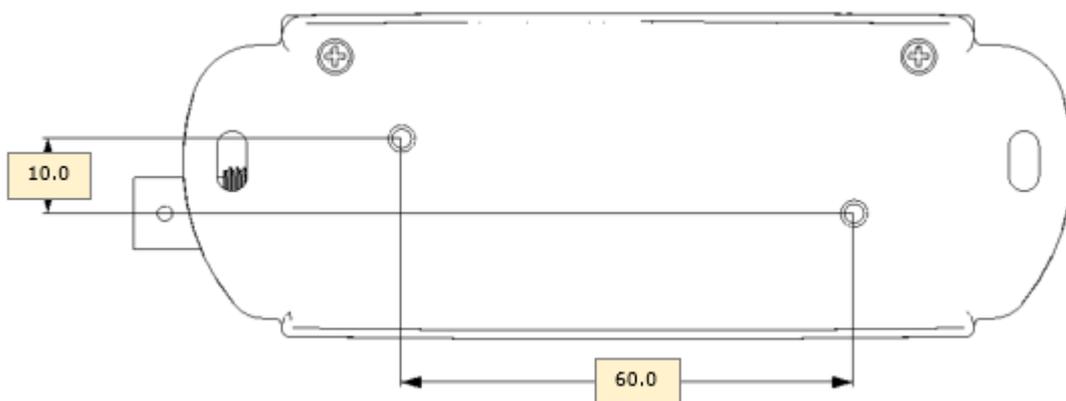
Modbus Dissolved Oxygen Sensor Adapter Dimension – Bottom View
